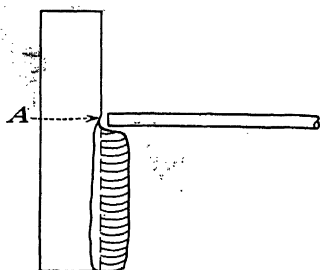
In making a vertical weld point the electrode directly into the weld. A. Throat of weld, or the fore edge of the puddle.
